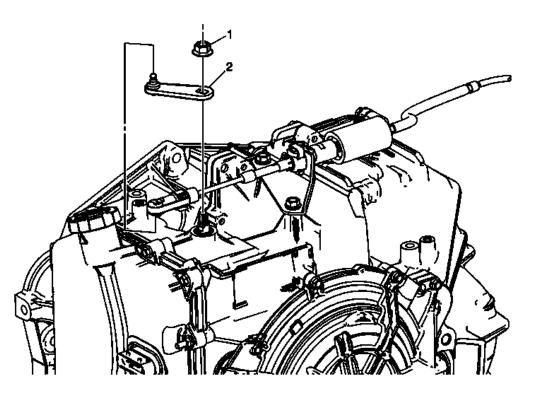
Transmission Control Module & Fasteners Courtesy of GENERAL MOTORS COMPANY
